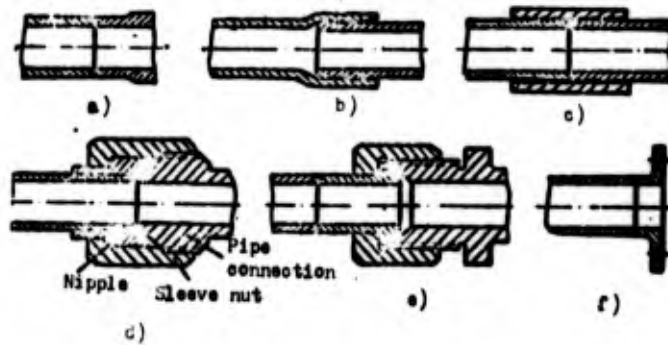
Methods of the connection of pipelines: a) joint welding; b) brazing in a telescopic connection; c) brazing with external sleeve; d) tightening of the rolled end; e) tightening of nipple; f) on flanges.
